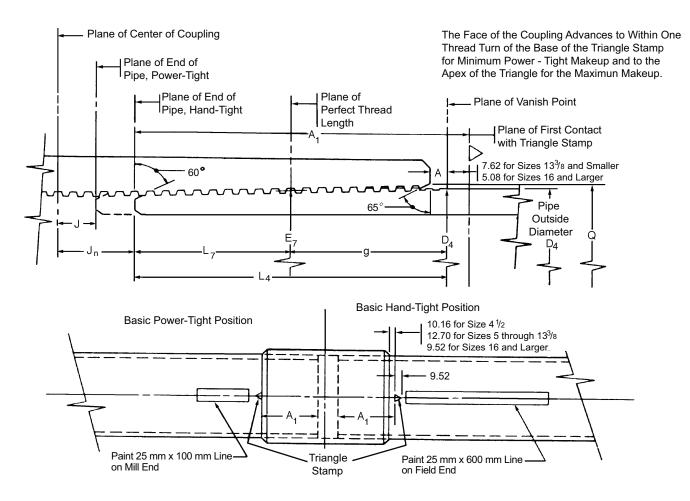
M—Basic Dimensions of Buttress Casing Threads Hand-Tight Make-Up (See Figures 6M and 7M for detail of thread form and dimensions.)
